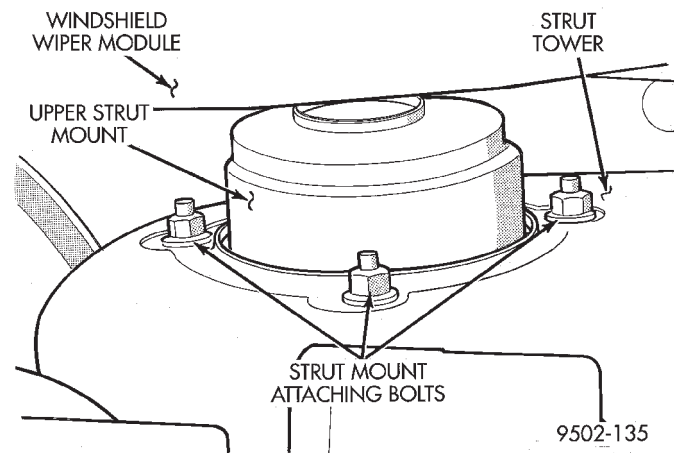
Strut Assembly To Strut Tower Attaching Nuts
